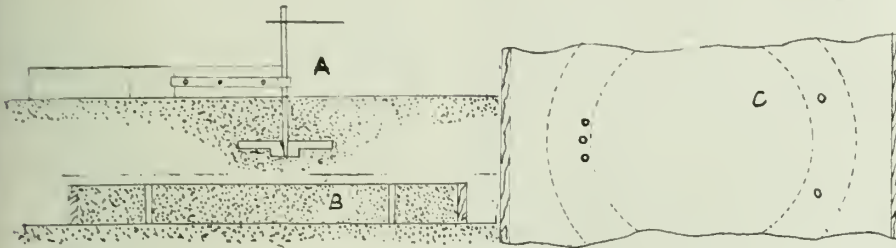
SWEEPING UP MOLD WITHOUT PATTERN.
